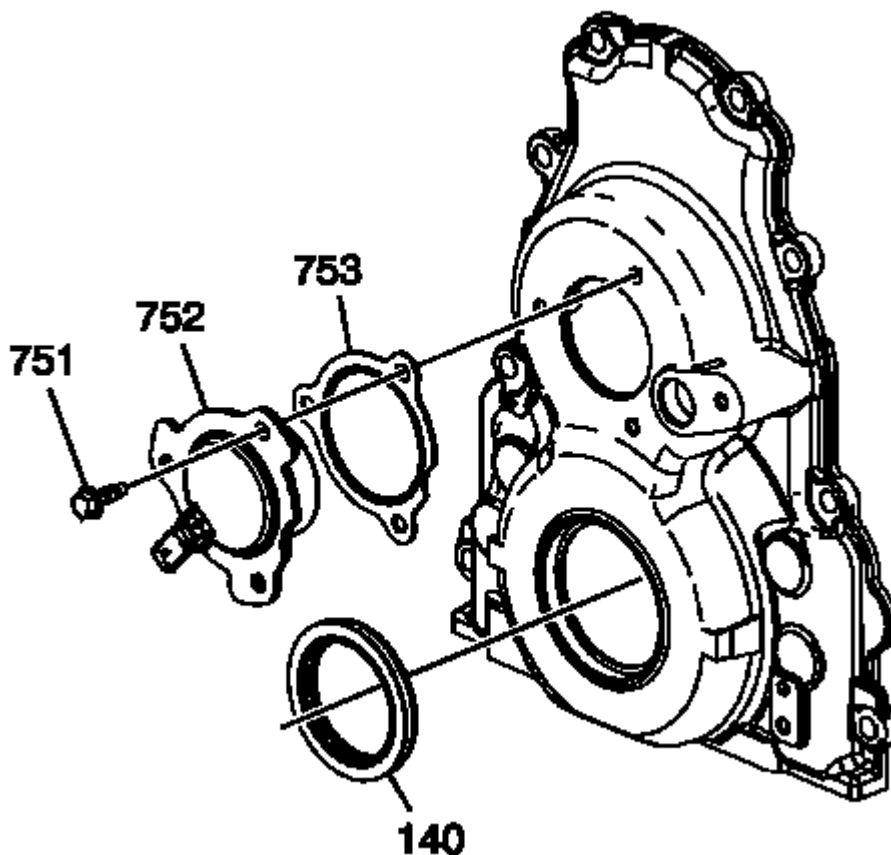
View Of CMP Actuator Magnet, Bolts, Gasket & Oil Seal
